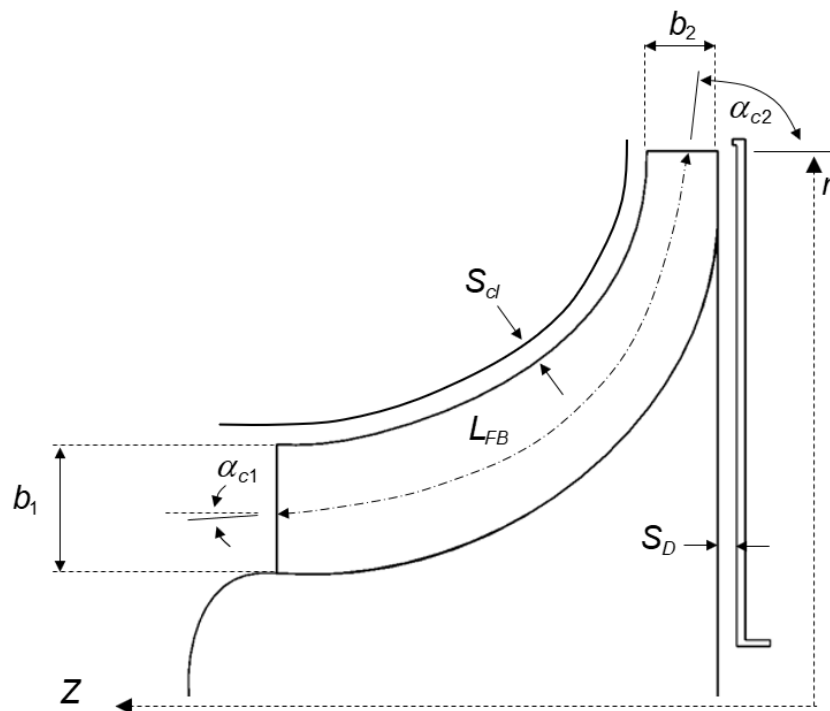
Cross-sectional view of a impeller in the $r-z$ plane
